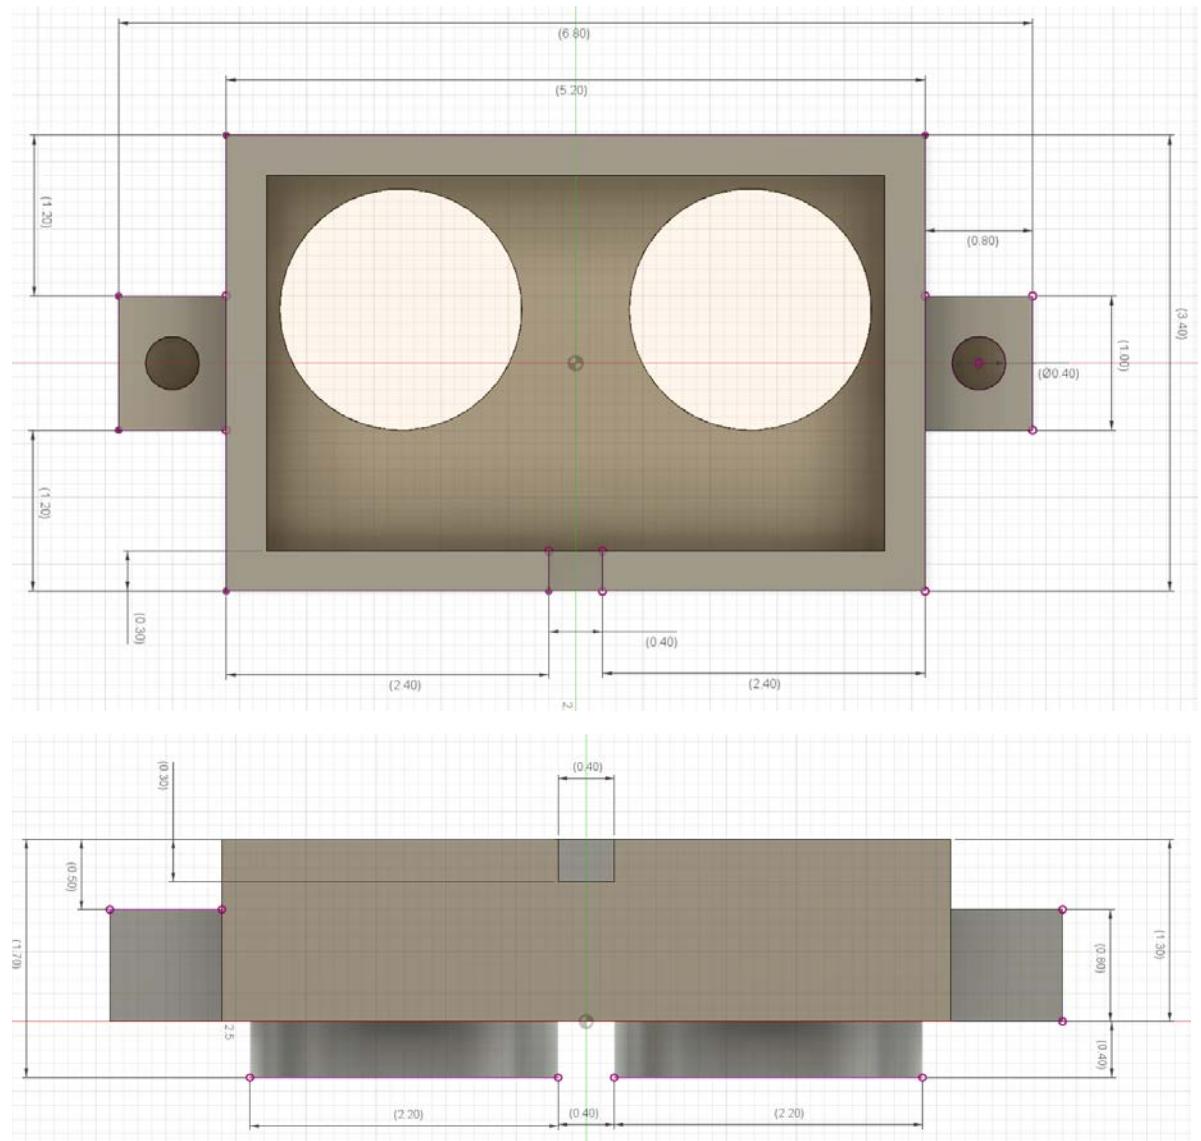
Ultrasonic Sensor Chassis 3D Design
